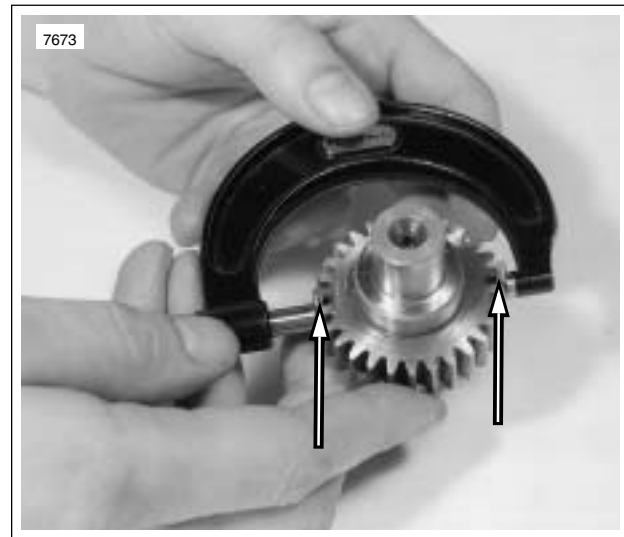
Measuring Gear Size with Pin Set (Part No. HD-38361)
